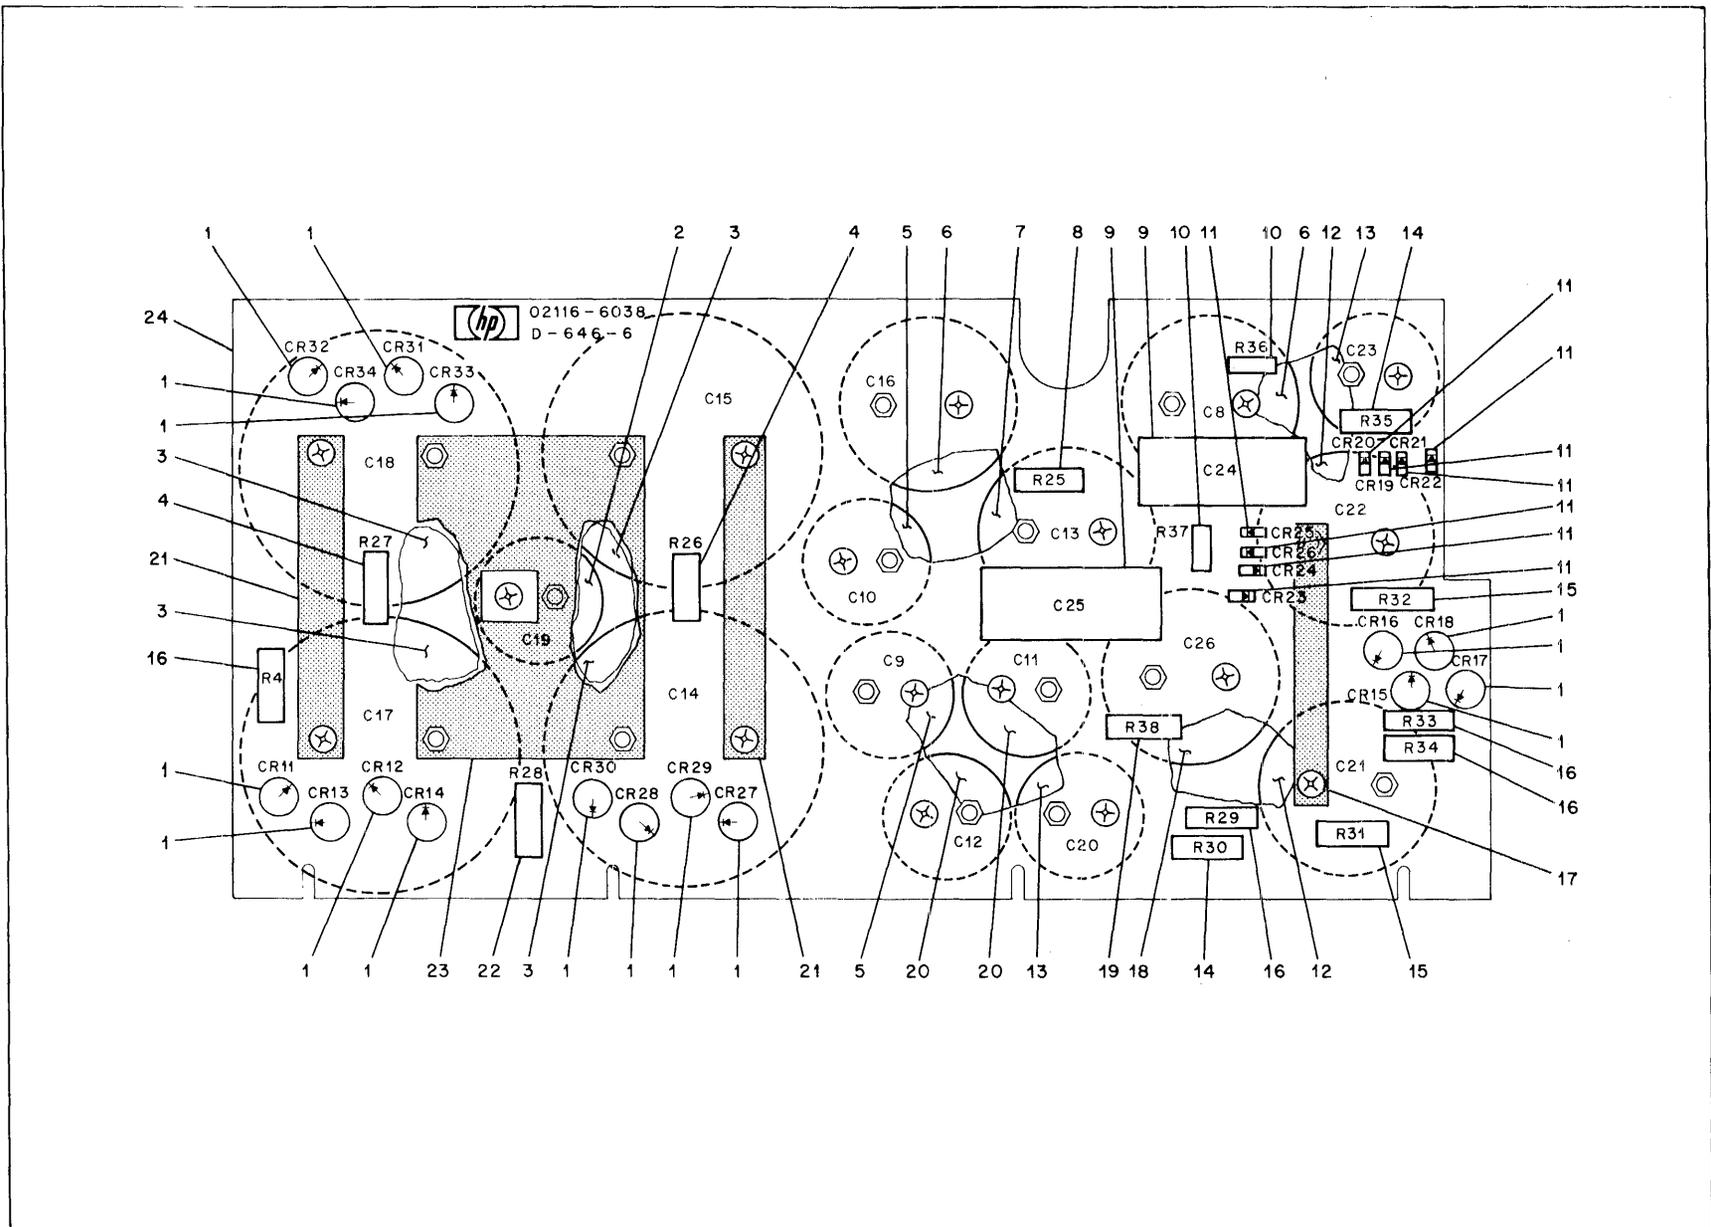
A306, A307, and A310 Component Board Assemblies, Parts Identification Diagram
